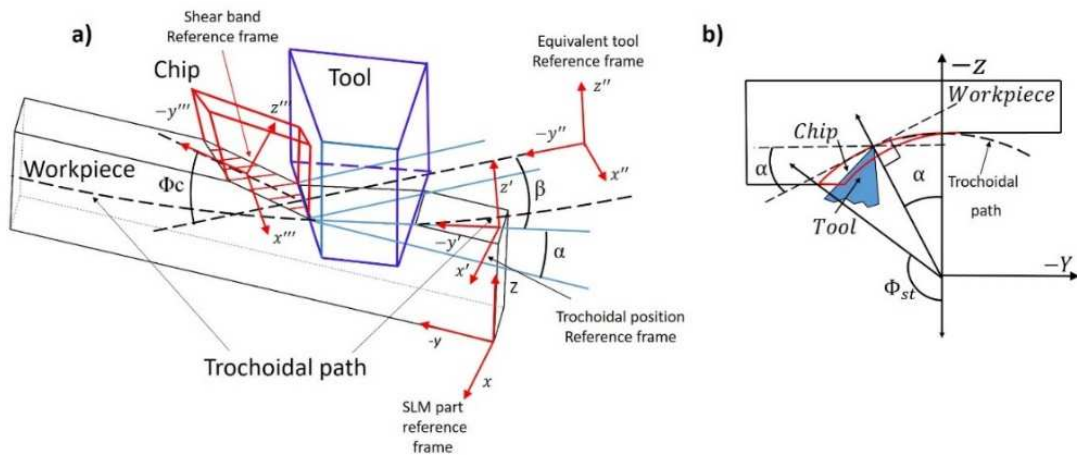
a) cutting and shear band geometry, b) details of engagement by the angle α
